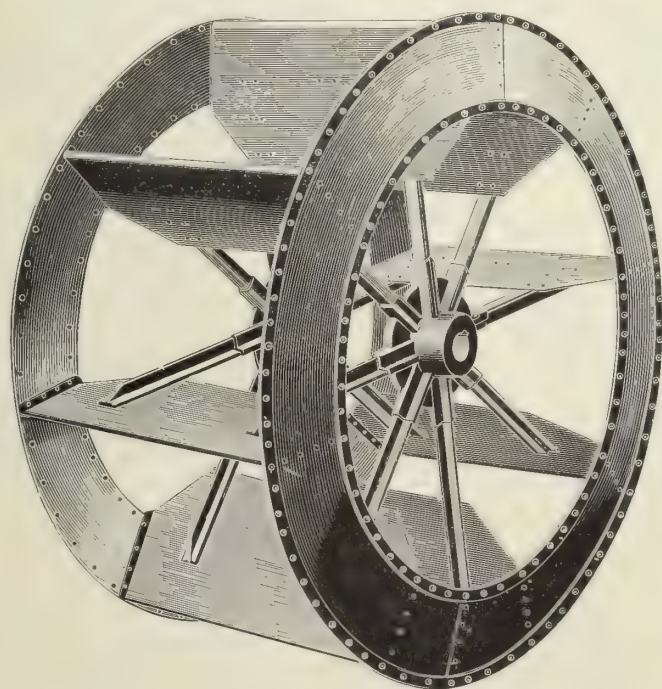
FAN WHEEL WITH STRAIGHT BLADES
